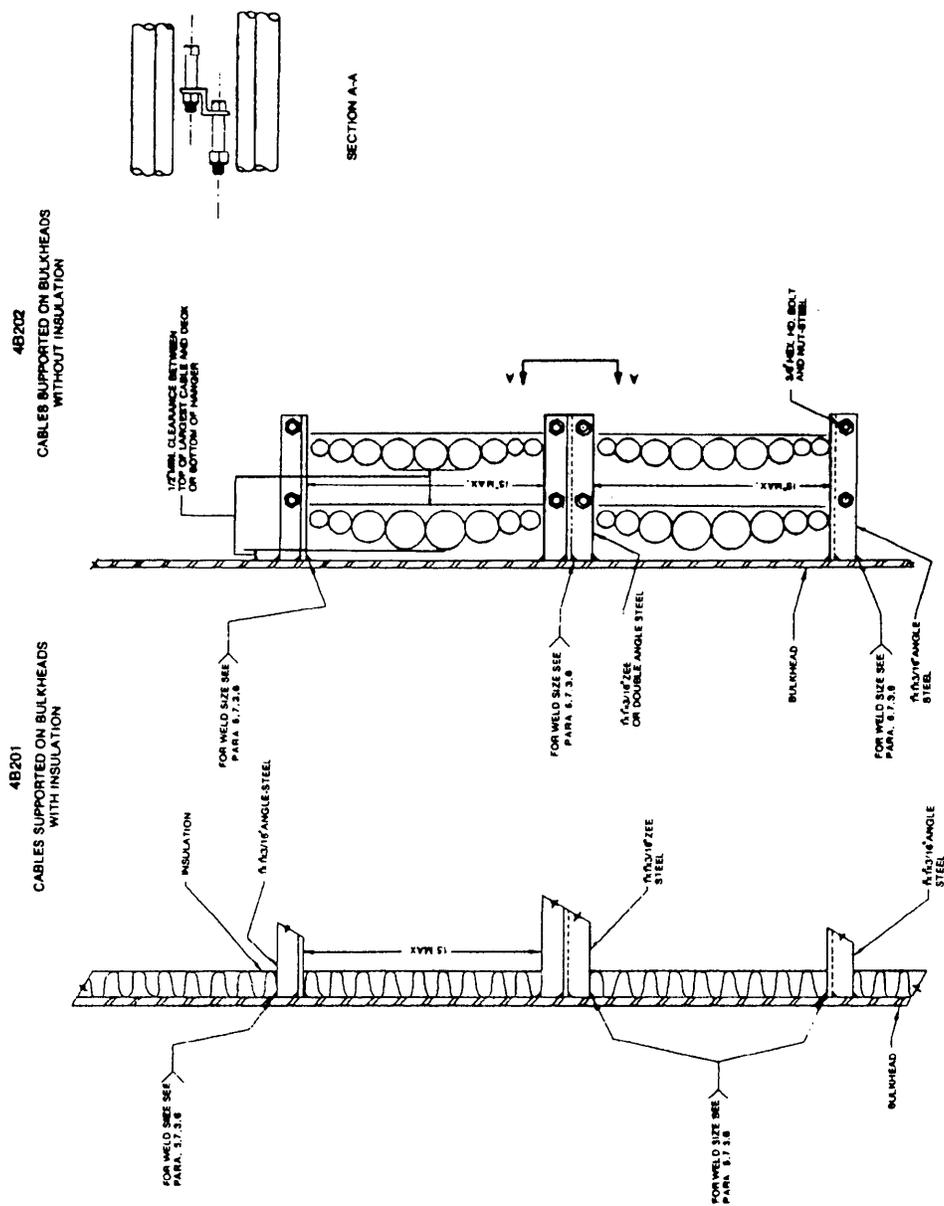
B20. Multiple cables on steel bulkheads (surface ships).
